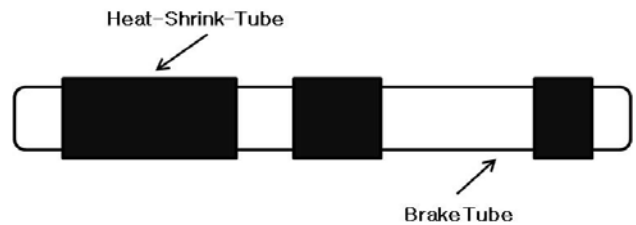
An example of brake tube insertion in heat-shrink-tube
